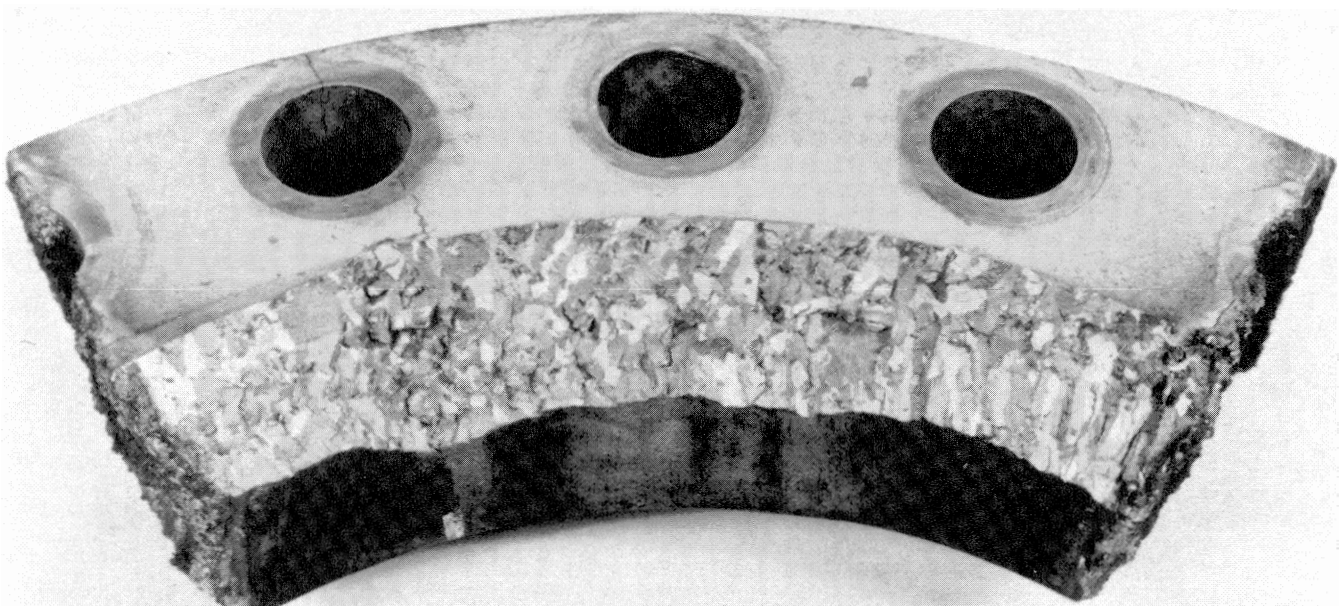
Brittle Fracture in 12 percent Cr Steel Casting.
